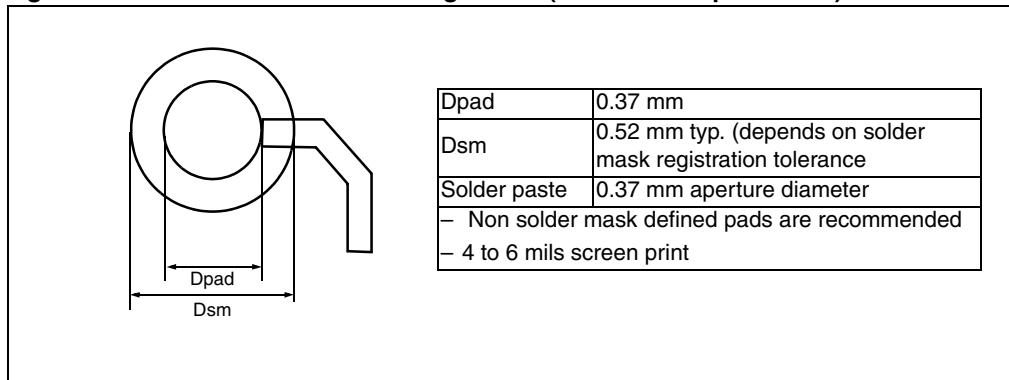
Recommended PCB design rules (0.80/0.75mm pitch BGA)
